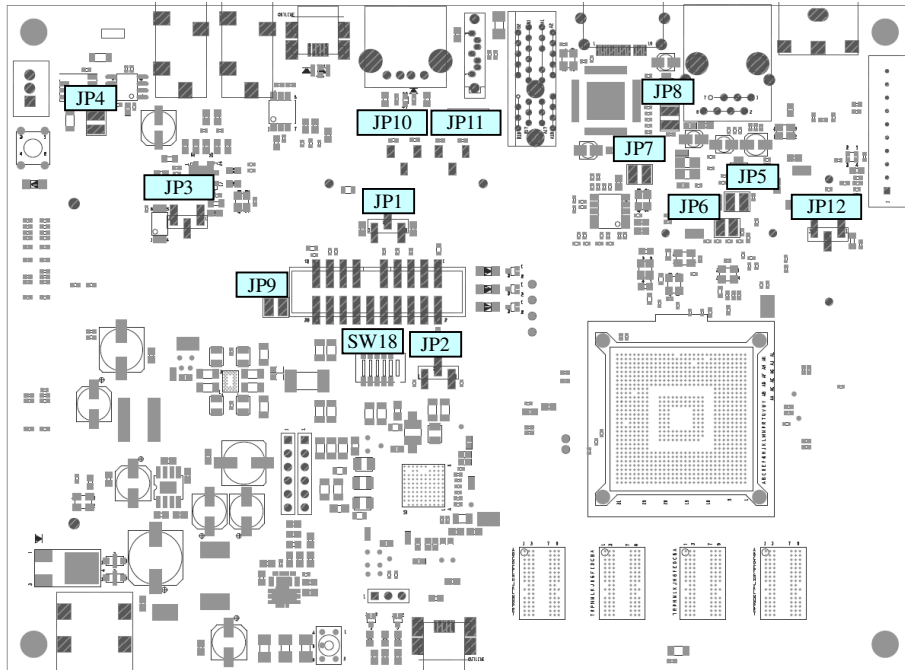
Location of Switches on the PORTER(REV.B) Board (Top Side)
